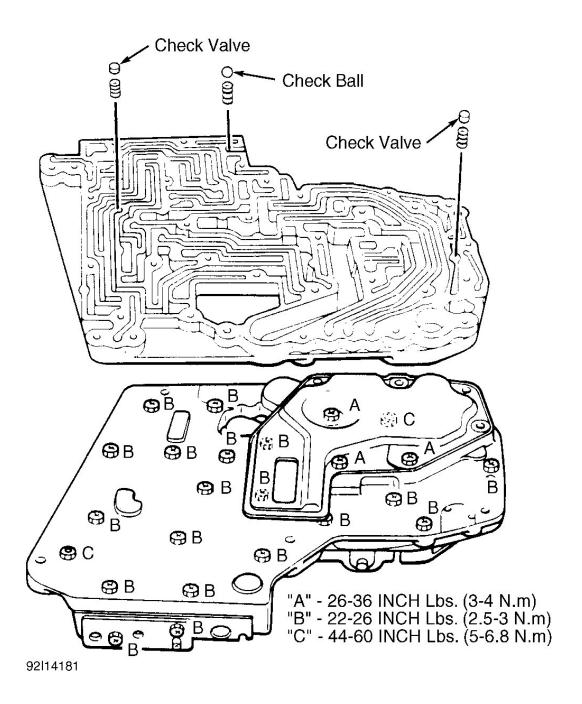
Locating Valve Body Check Balls & Tightening Bolts Courtesy of GENERAL MOTORS CORP.
